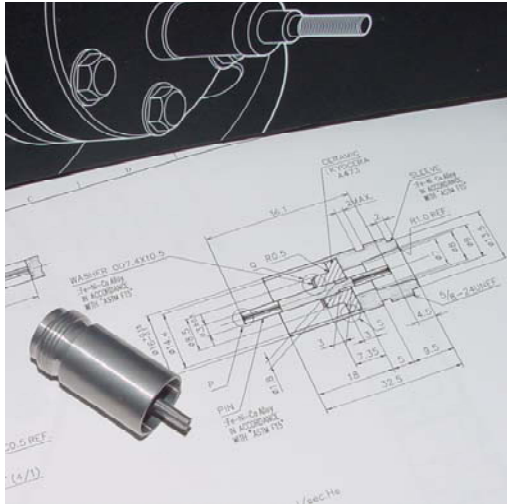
Photo of an N type feedthrough, company Kyocera, and it technical drawing.
